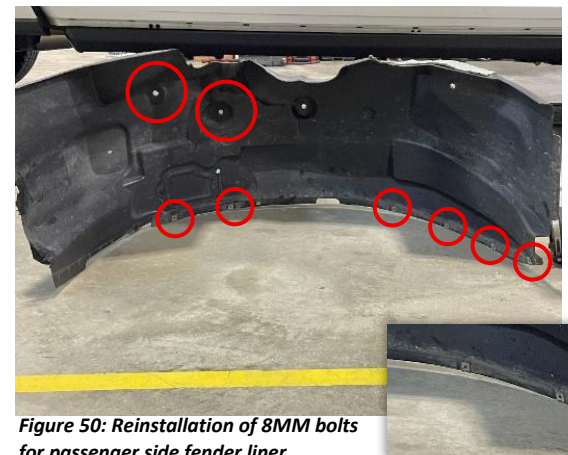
Reinstallation of 8MM bolts for passenger side fender liner.
